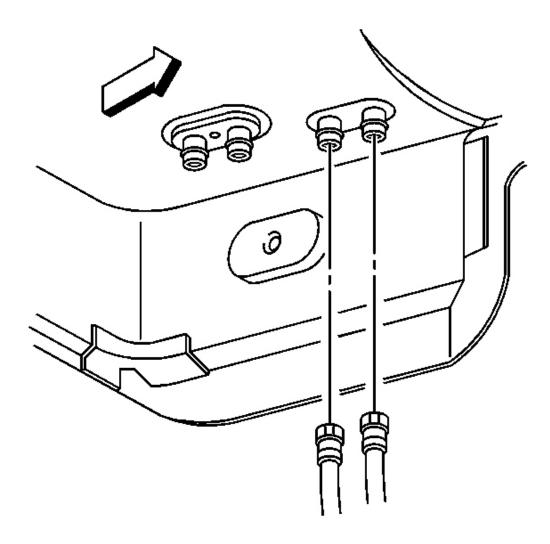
Removing/Installing Rear Ducting Courtesy of GENERAL MOTORS CORP.
